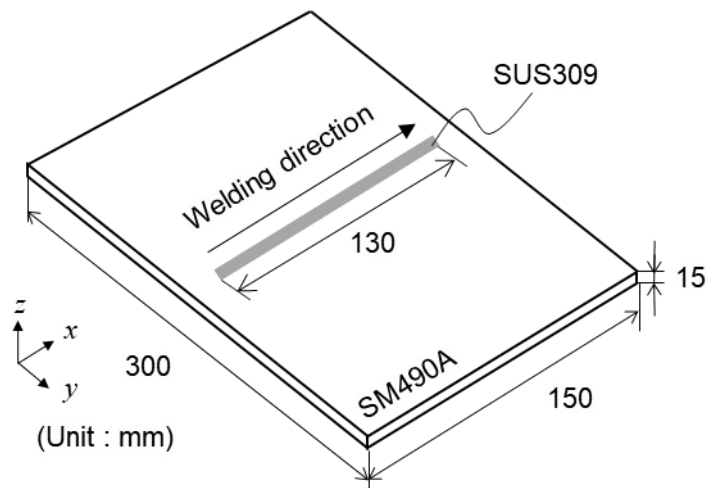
Configuration of bead-on-plate welded joint.
